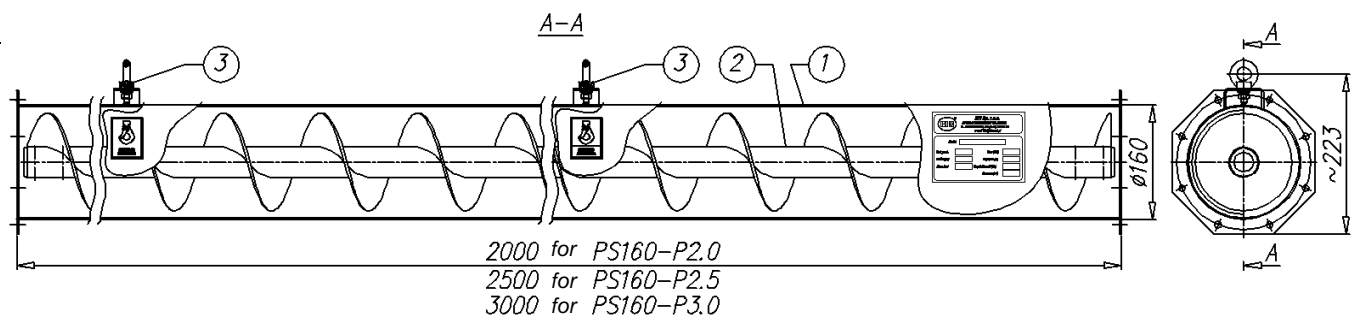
PS160-P2.5-screw conveyor  $\varnothing\varnothing 160\text{mm}$  – 2.5m length
